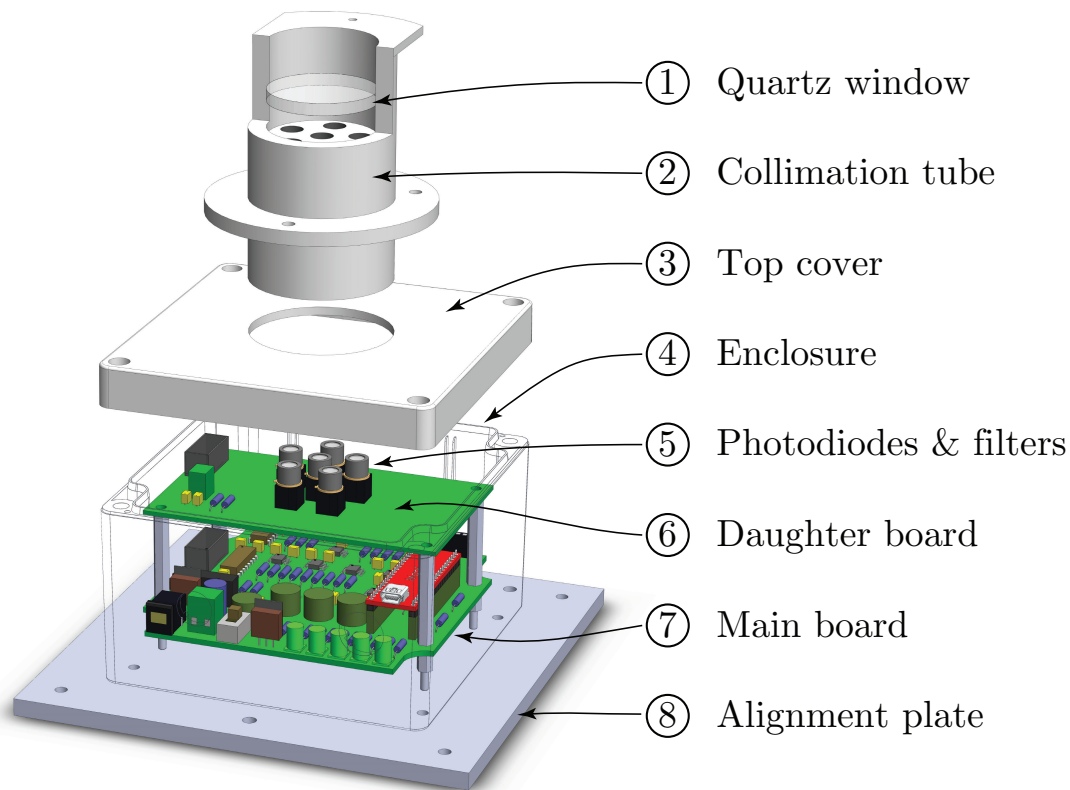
The exploded of view of the SSIM prototype. The SSIM design primarily falls under the opto-mechanical and the electrical categories.
